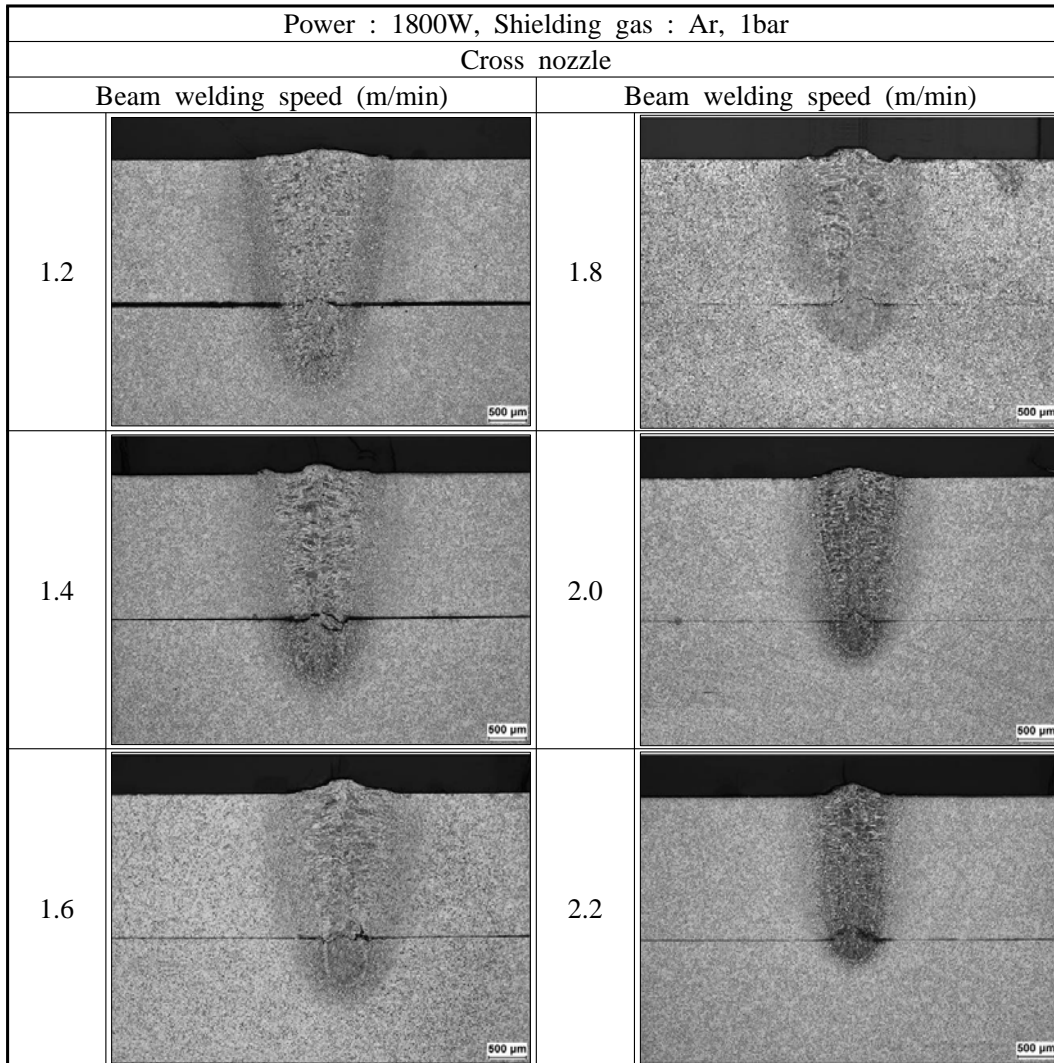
Cross-section of welding zone after beam welding speed
